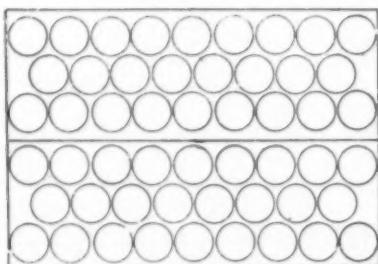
AN OLD AND WASTEFUL METHOD OF PUNCHING OUT BLANKS.
